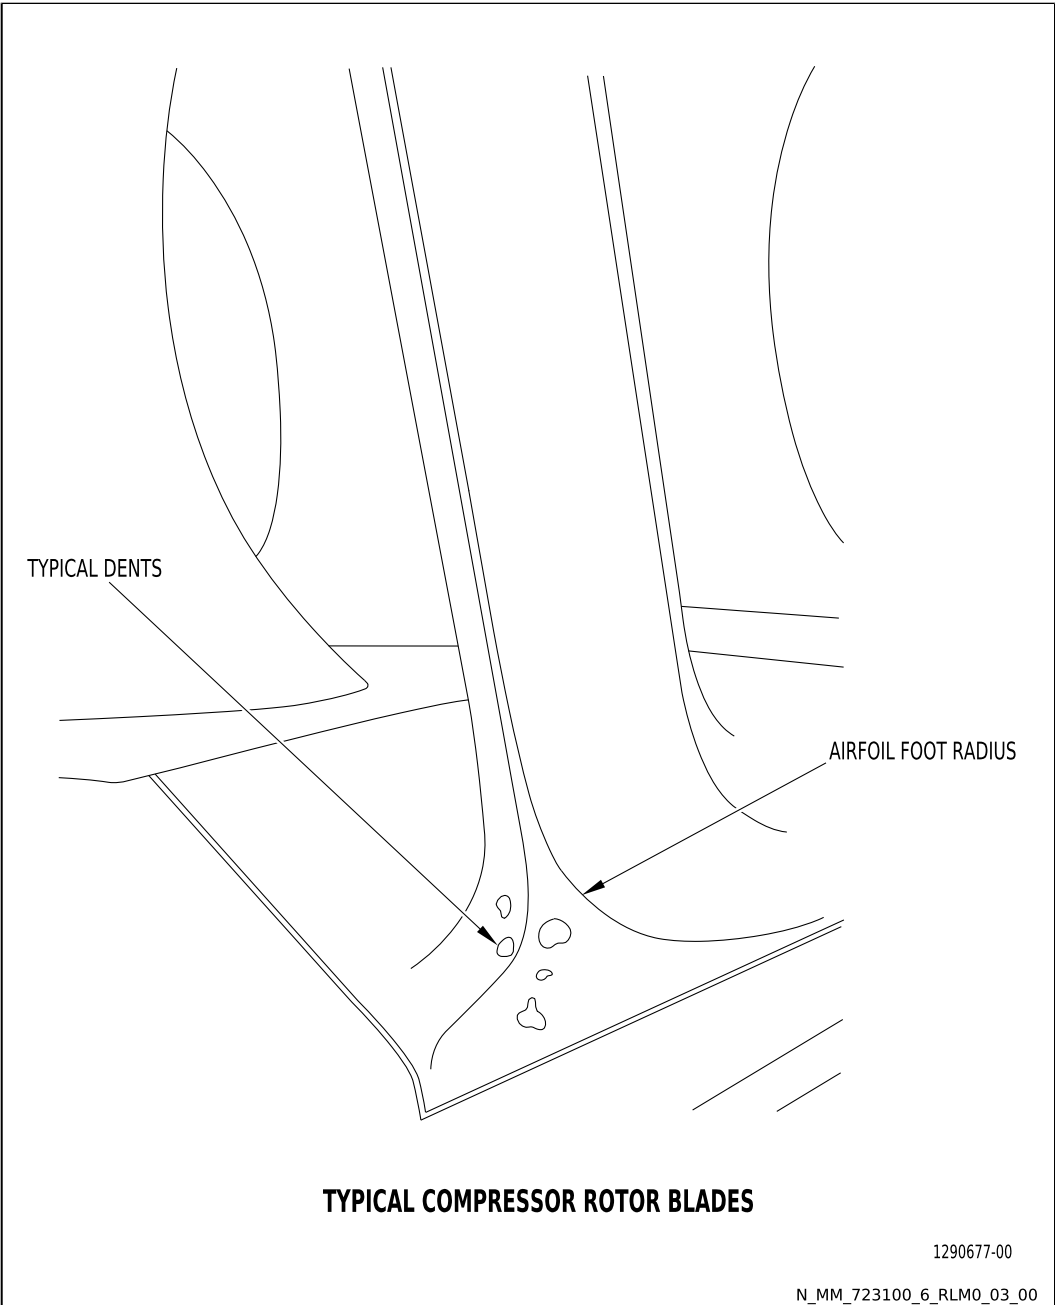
A (SHEET 2/3) - Compressor Blades Inspection
